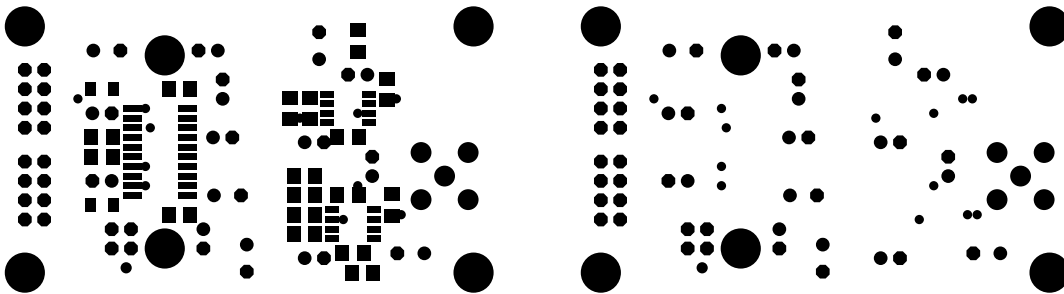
1 MHz 24-bit D/A converter top and bottom solder mask. Left image is top solder mask.
